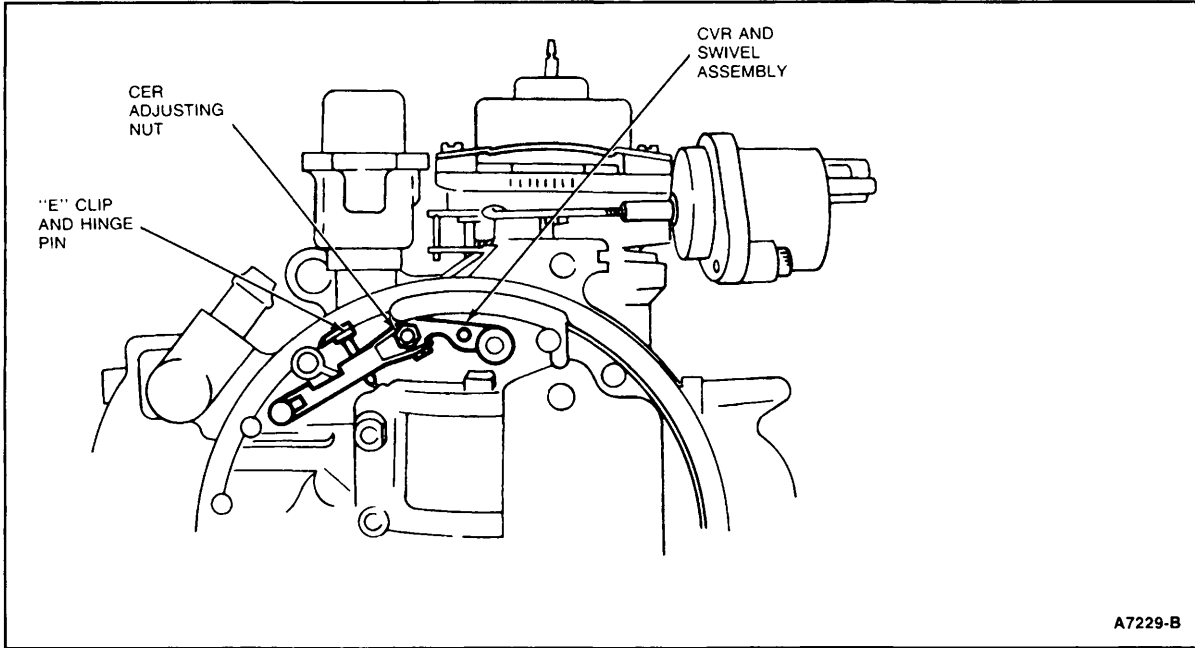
Control Vacuum Regulator (CVR) Swivel Assembly Replacement
